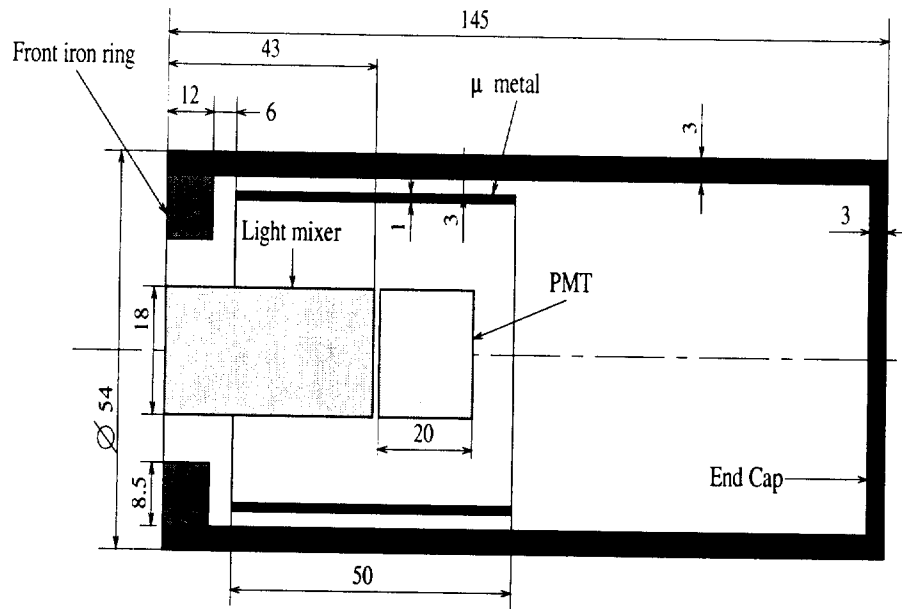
Optimum shielding design. Dimensions are given in mm.
